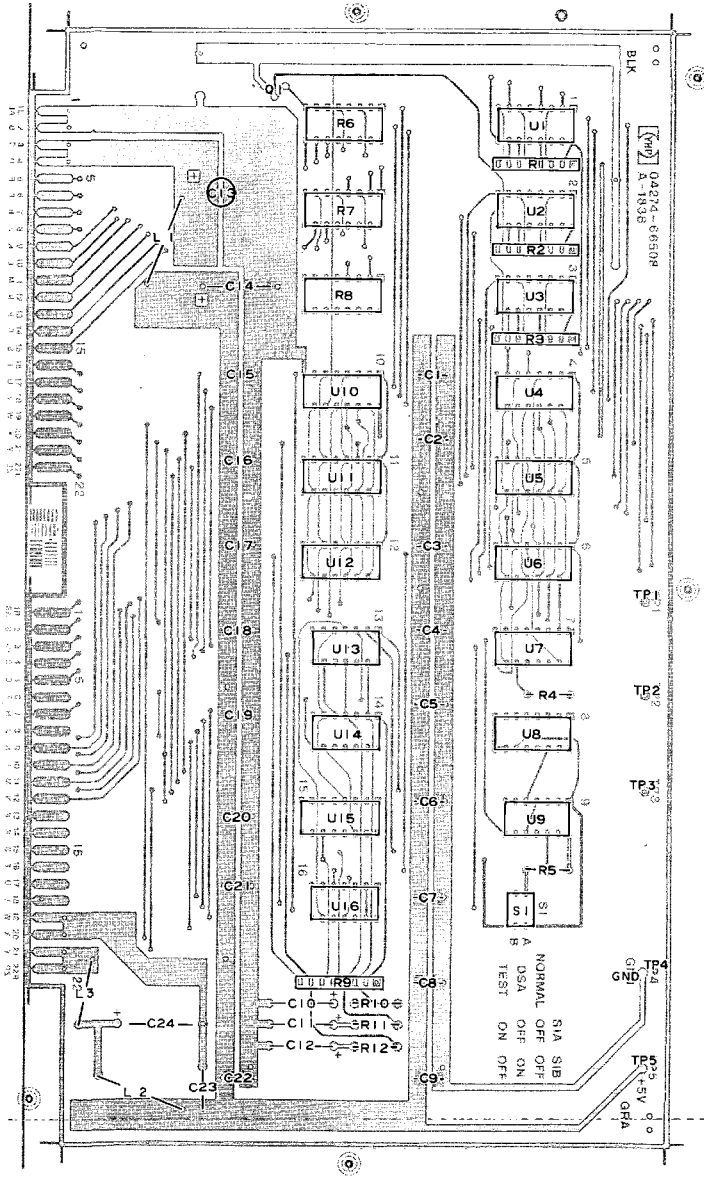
A8 DISPLAY CONTROL ASSEMBLY COMPONENT LOCATIONS.
